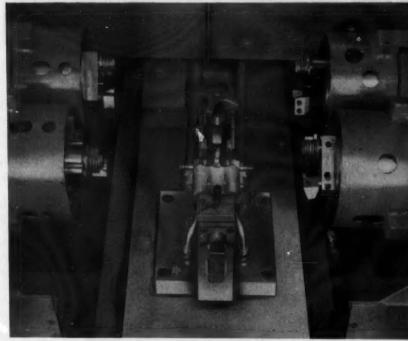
A closer view of the tooling used to machine the cylinder block (Fig. 11). The fixture is hydraulically operated to speed loading and unloading. Two of the tools are 7.5-inch-diameter, sidemilling cutters running at 598 rpm while the table feeds by at 6.07 ipm.
